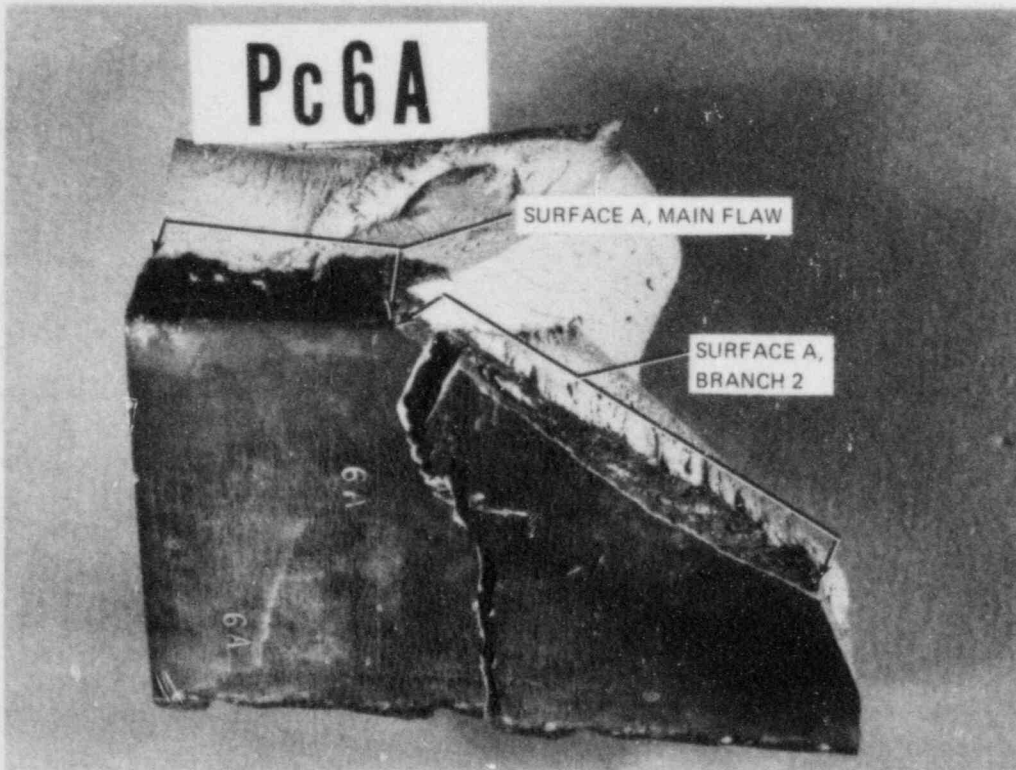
Fracture surface showing propagation of first crack into Pc6A. Surface A of main flaw and of branch 2 is shown.
